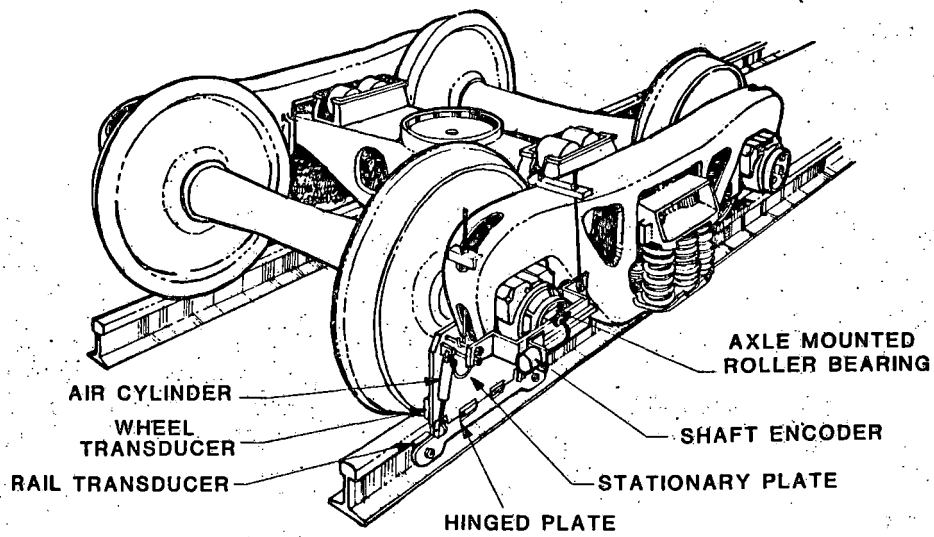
WHEEL/RAIL DISPLACEMENT MEASUREMENT FIXTURE
